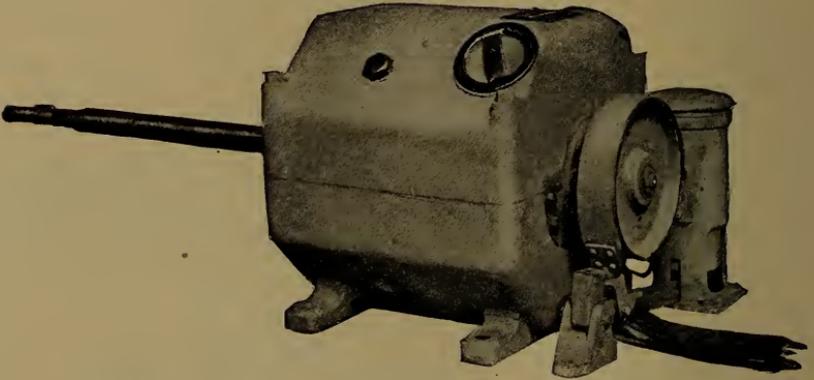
Assembled Solenoid Band Brake. Gen. Elec. Co.
